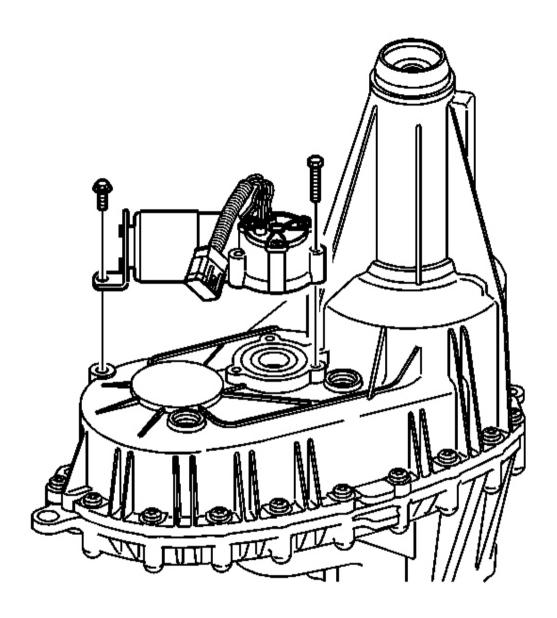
Transfer Case Encoder/Motor Assembly Courtesy of GENERAL MOTORS CORP.
